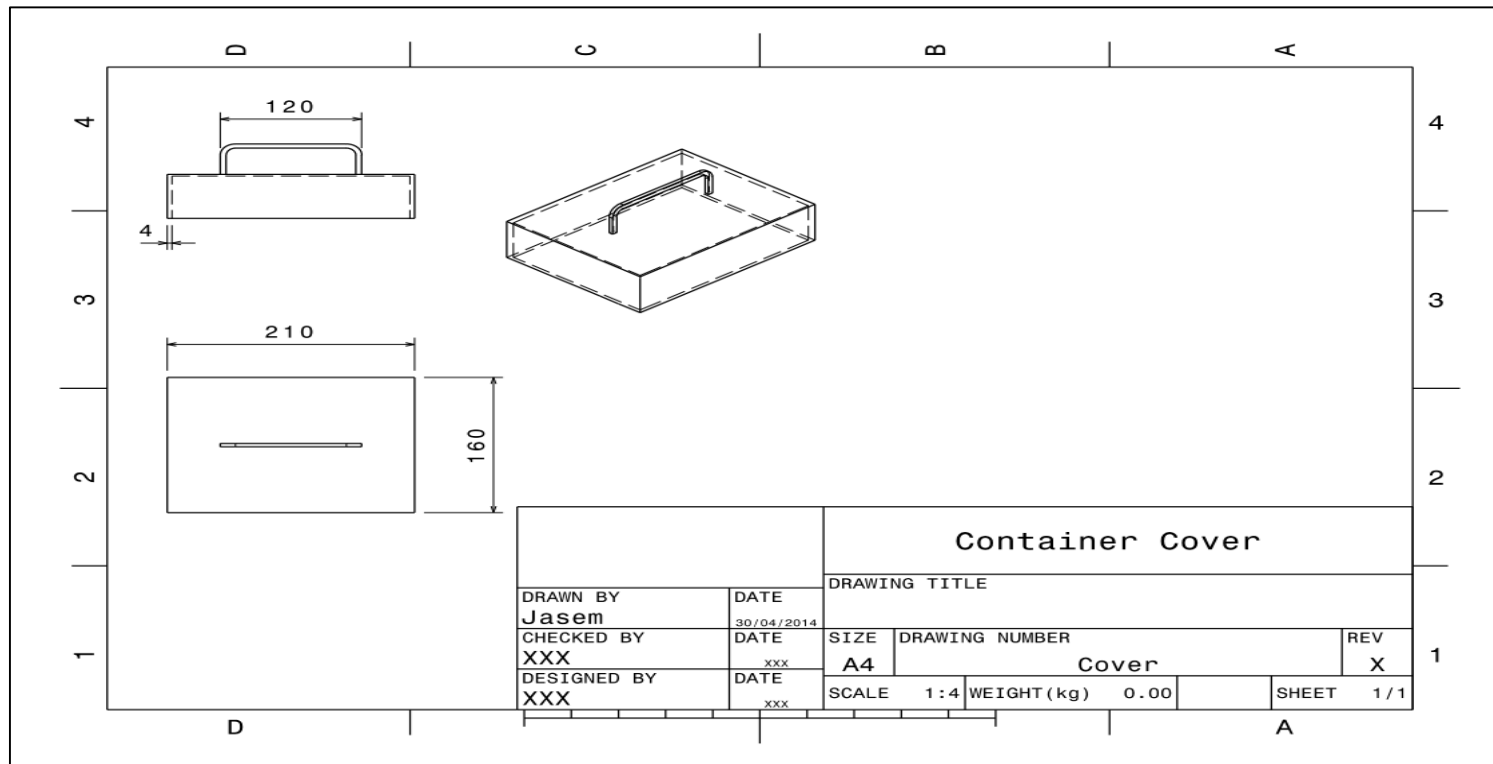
Two-dimensional views of the machine cover for the hybrid tribology machine with the ISO.
